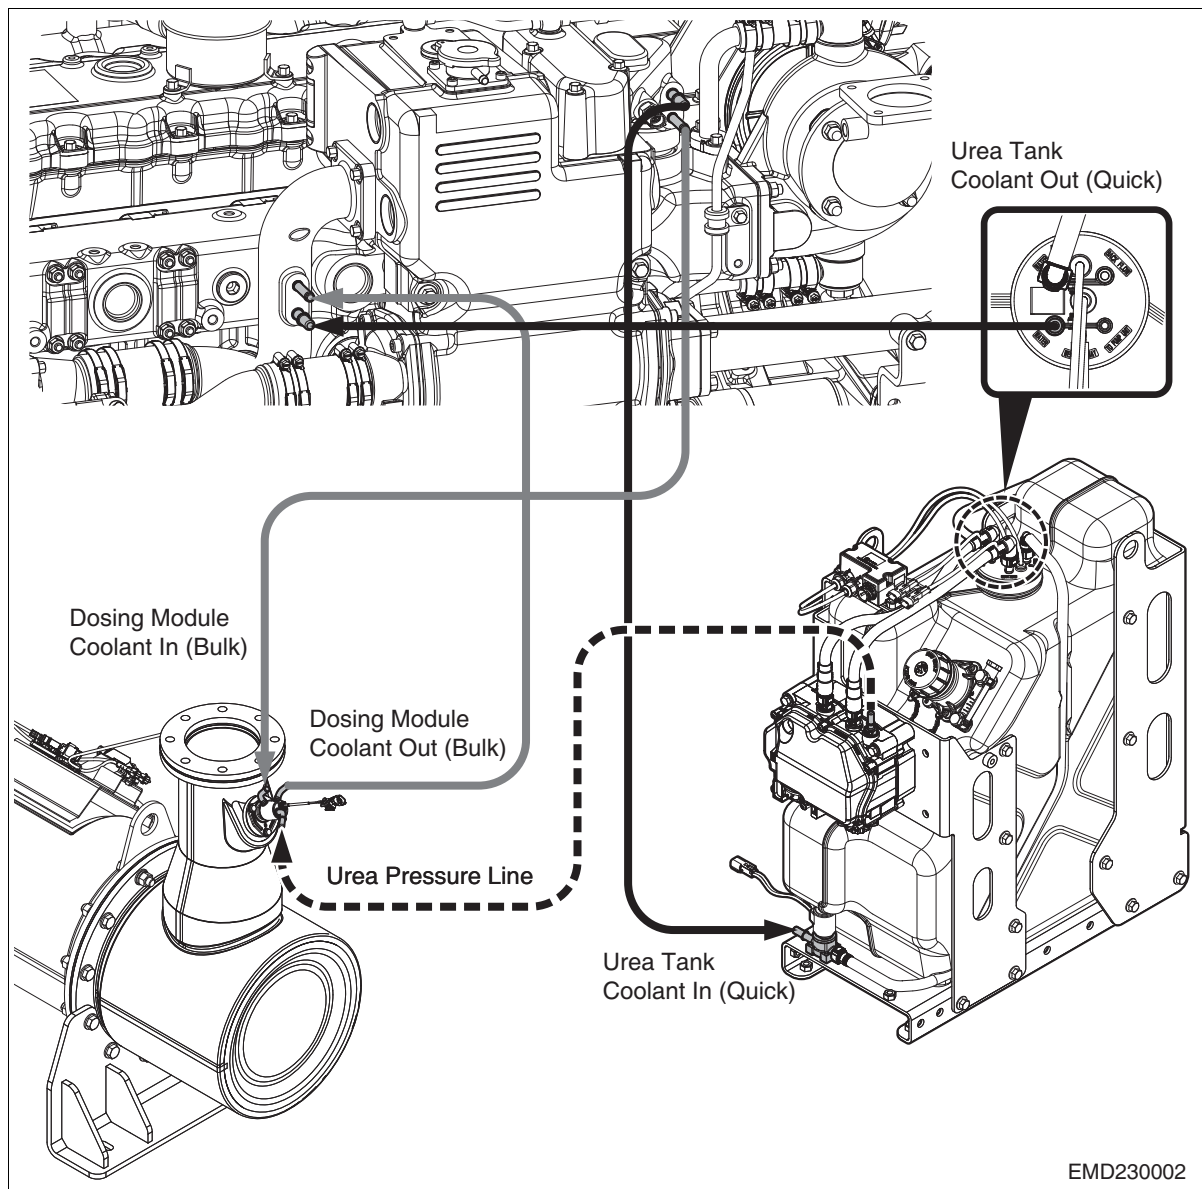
Urea Tank heating & Dosing Module cooling Hose connection (DL06)
